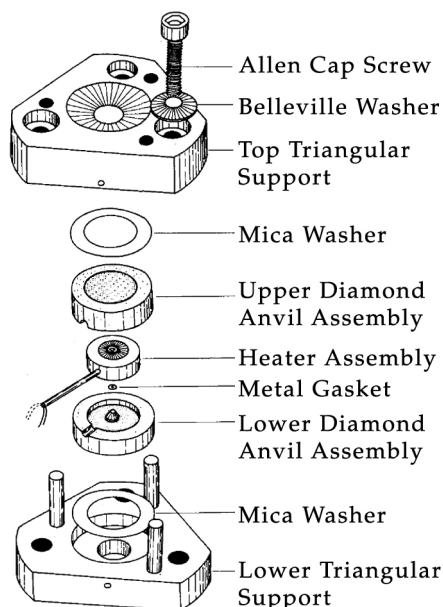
Exploded view of the PT cell assembly. Pyrophyllite components are stippled [123].
